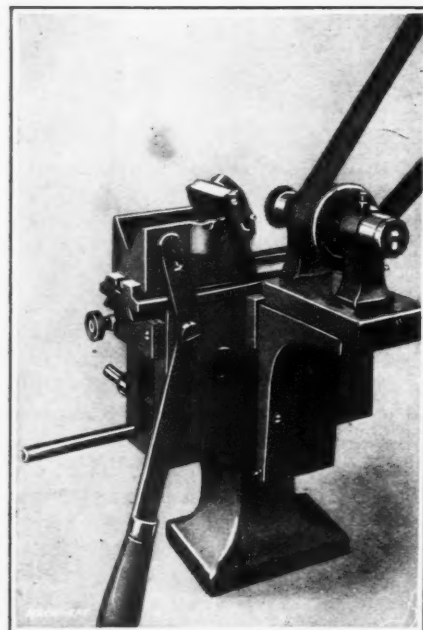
Hand Milling Machine and Fixture used for cutting off Setting Pin to Length
